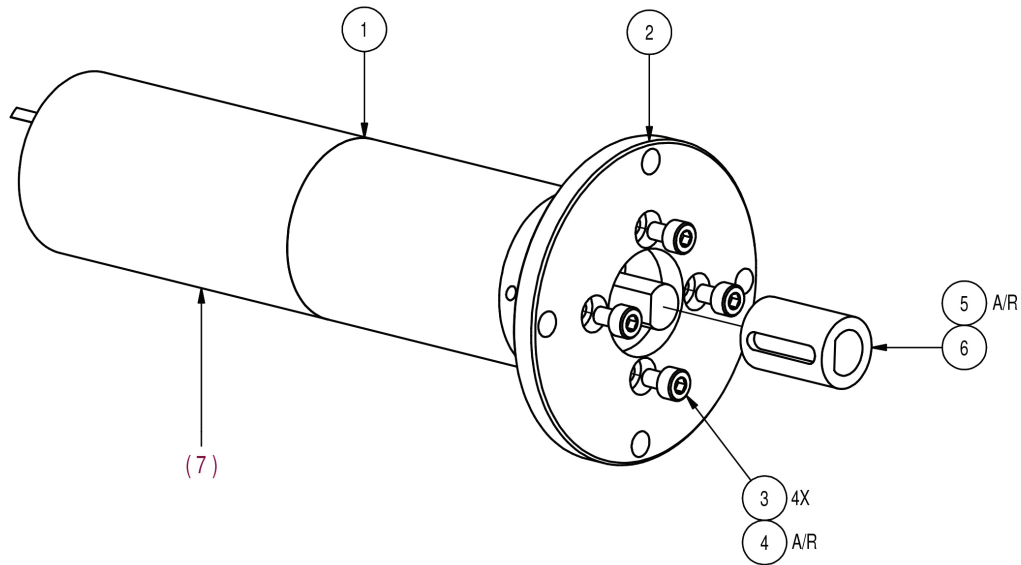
CUTTER HEAD ASSEMBLY, GIANT CUTTER, GK414
